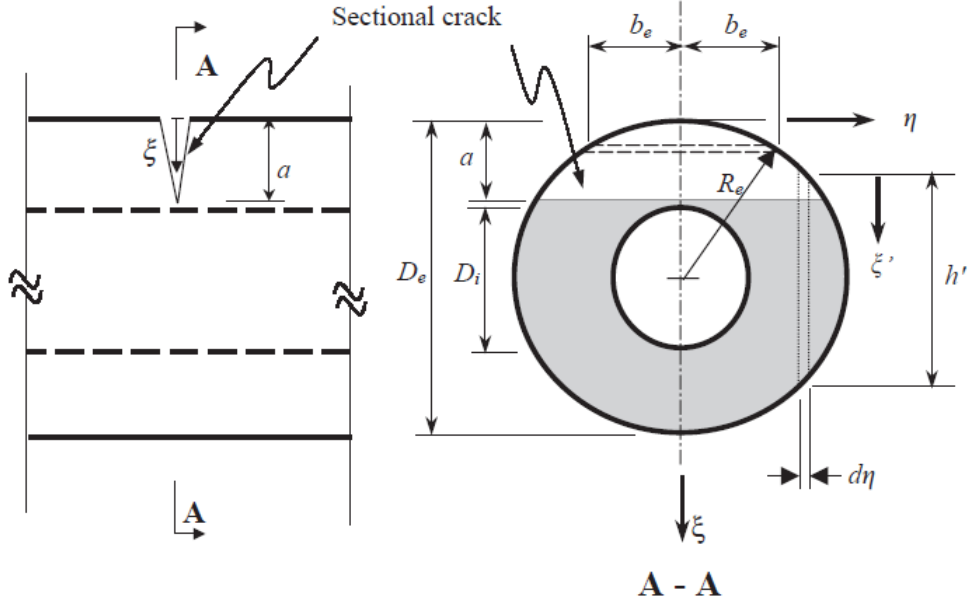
Crack in a circular hollow section beam – Case 1 [22]
